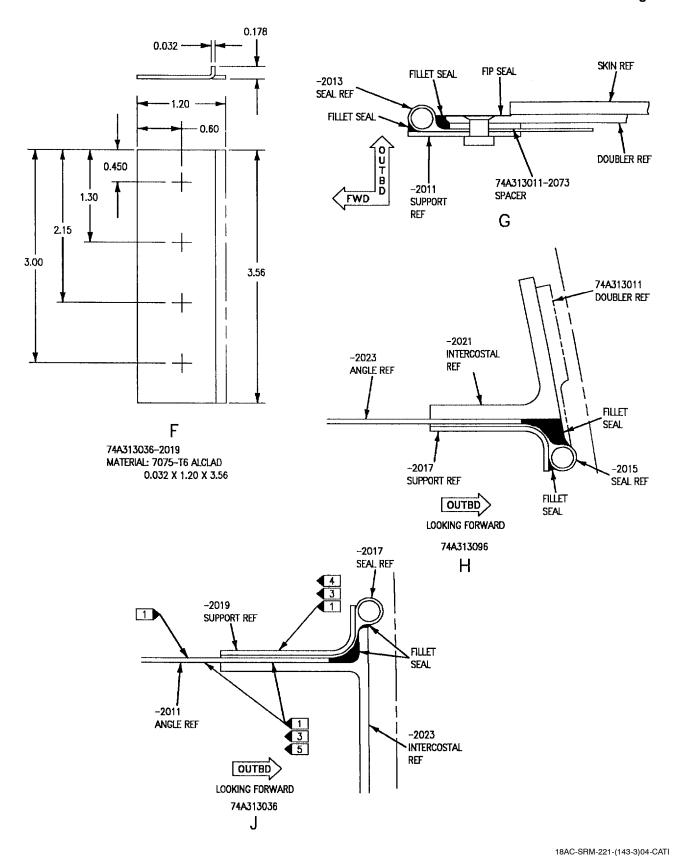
Replacement, Gun Purge Door EMI Seals (Sheet 3)
